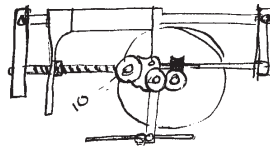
shews a plate phonograph The feed being obtained by a worm on the plate shaft & worm wheel on the Traveller armshaft.
